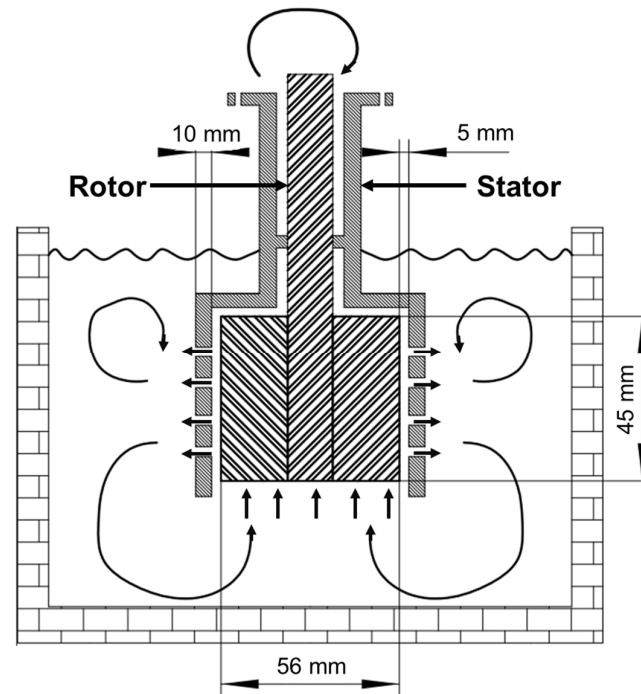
The schematic structure and dimensions of the rotor–stator device.
